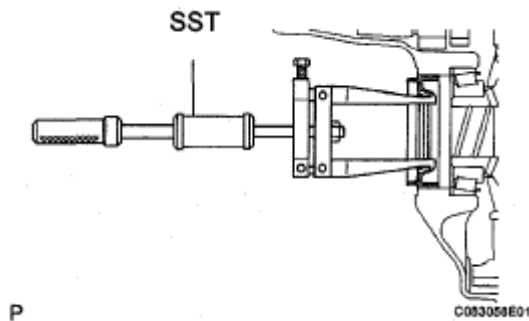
Pulling Out Differential Side Bearing Retainer Oil Seal
